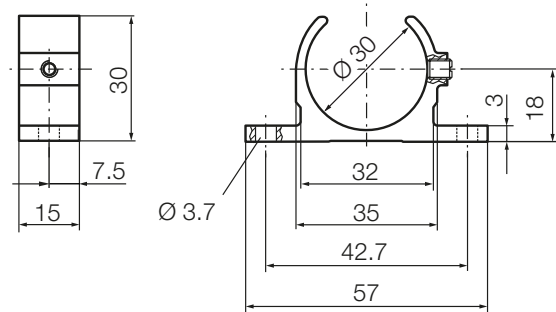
Mounting bracket BTL6-A-MF01-A-43
